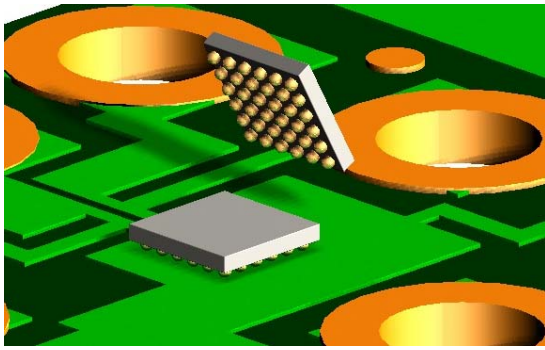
Concept of the flip chip power MOSFET being mounted on PCB.
